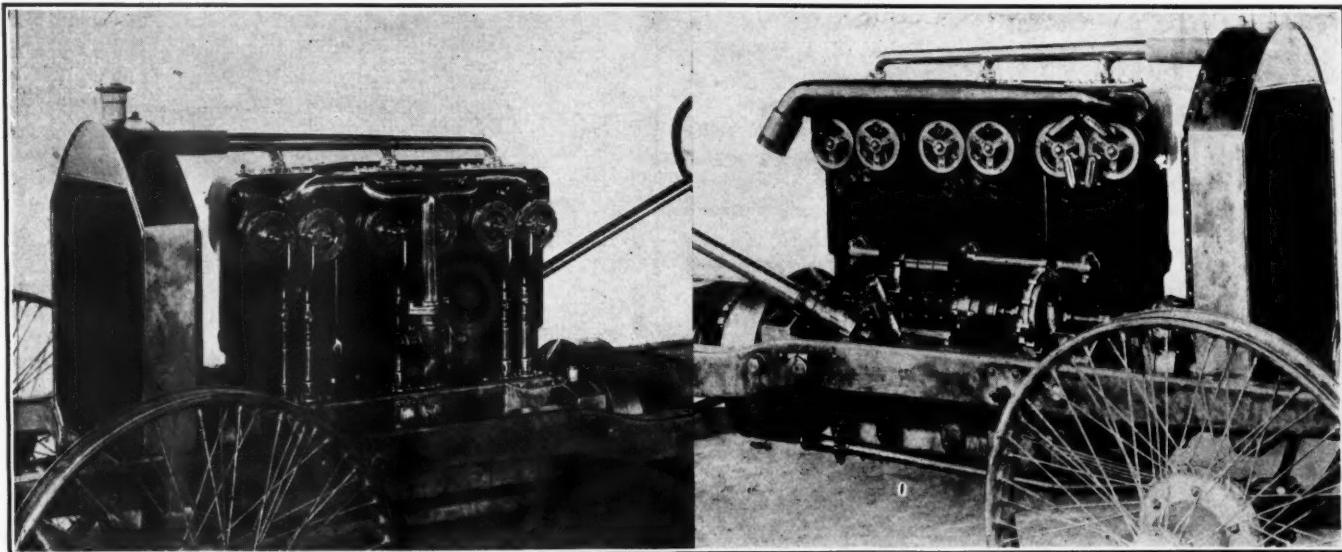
Views of both sides of new engine as assembled in trial chassis to be tried on road
